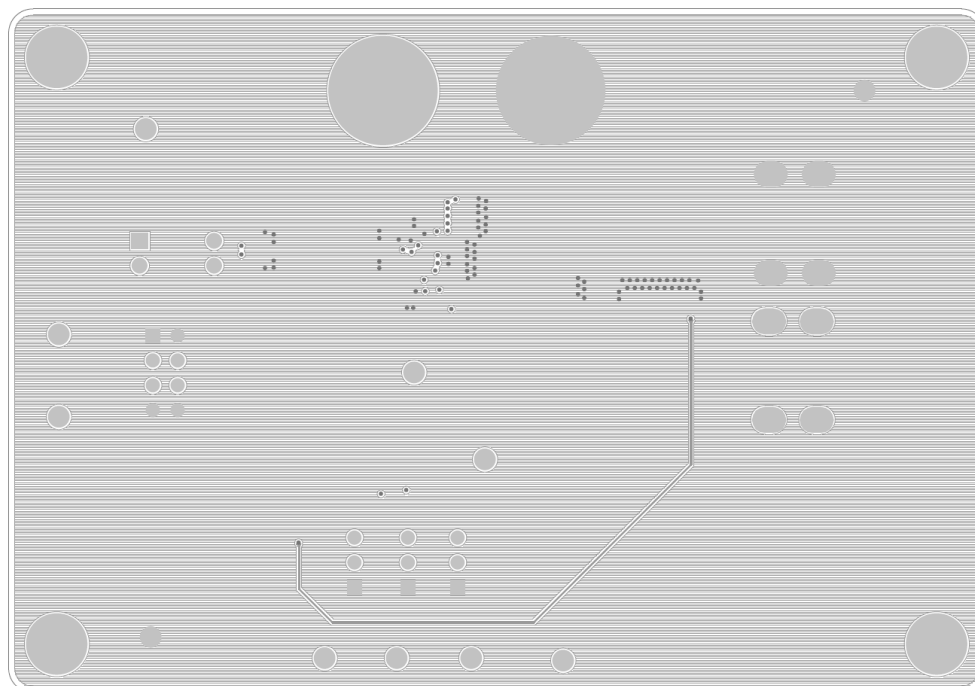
PCB Layout—Inner Side (2<sup>nd</sup> Layer)
